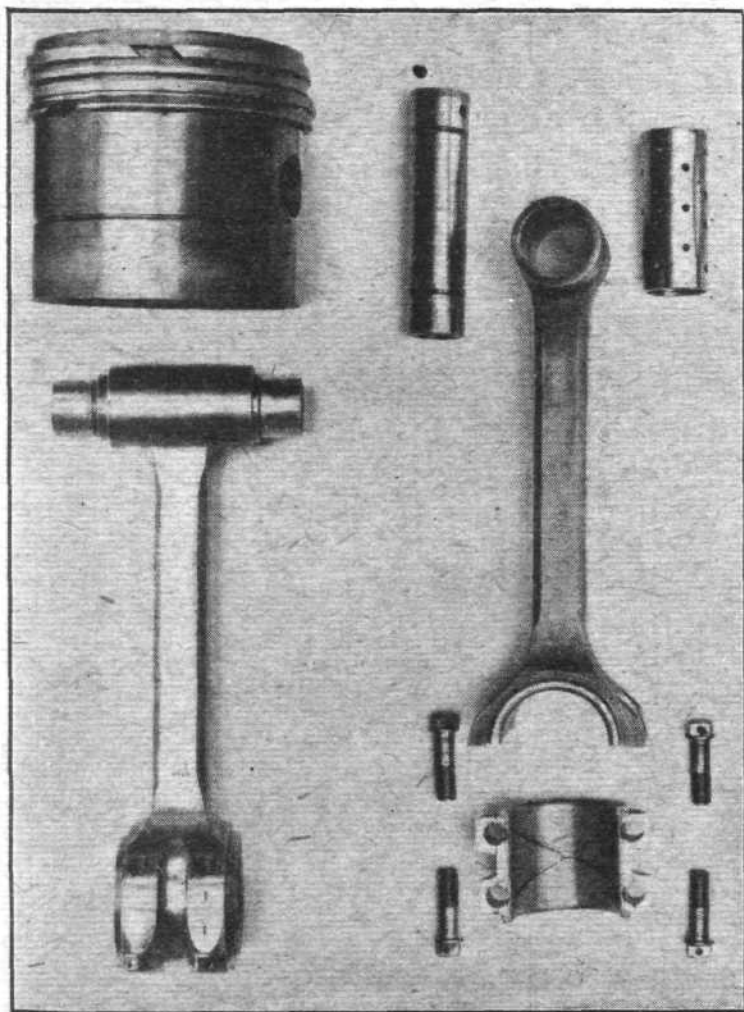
View of piston, connecting rod, big-end bearing cap, gudgeon pin, and floating small-end bush.
